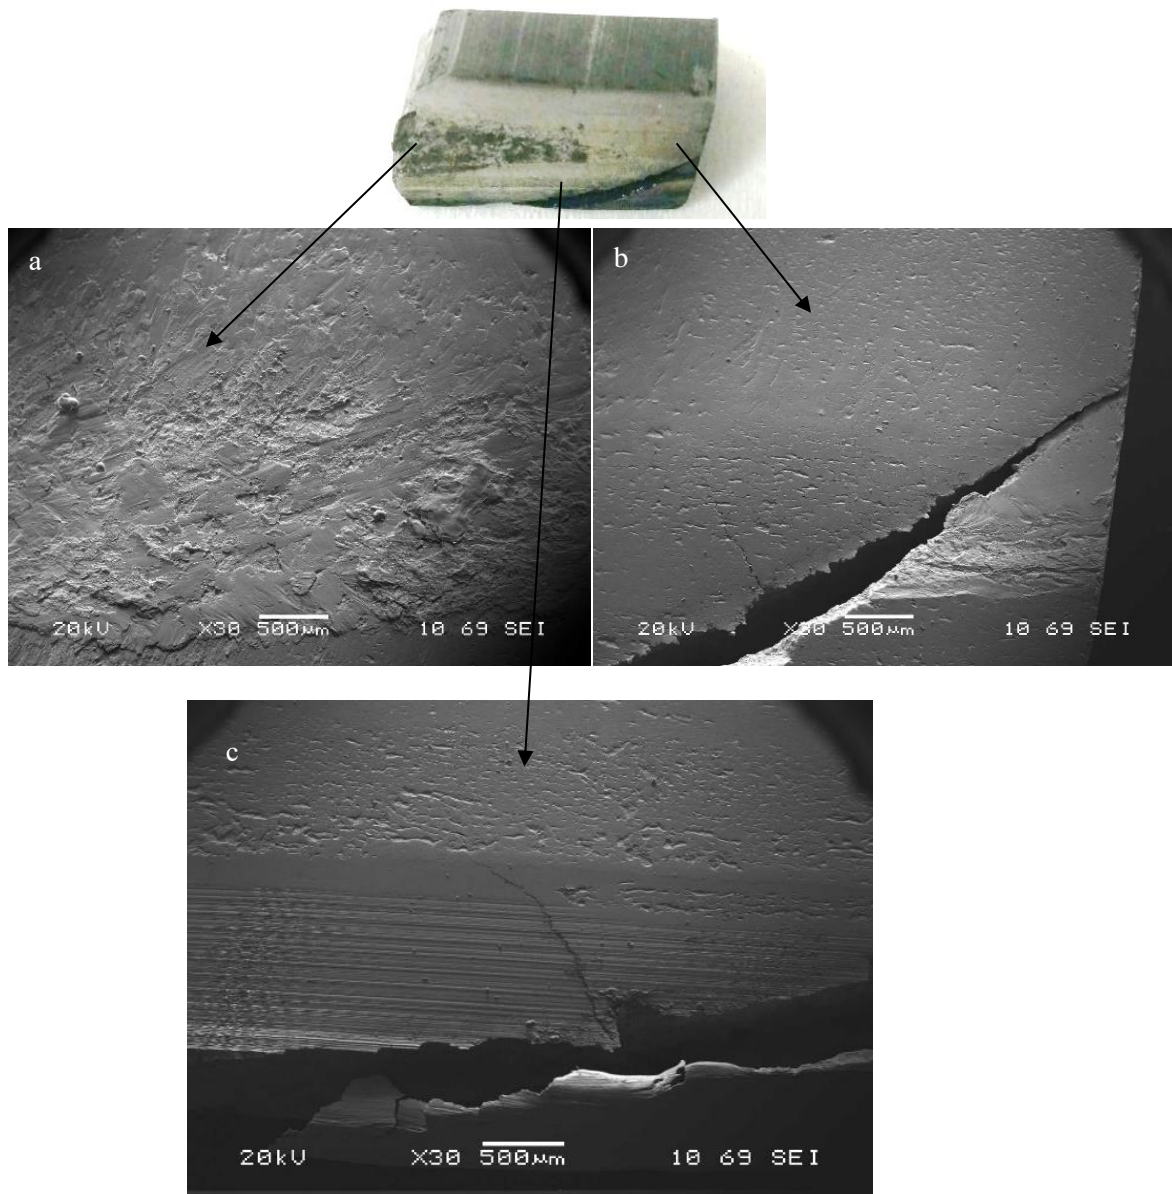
Surface morphology of the damaged contact surface of the gear tooth, showing severe scuffing, micro-pitting and cracking
